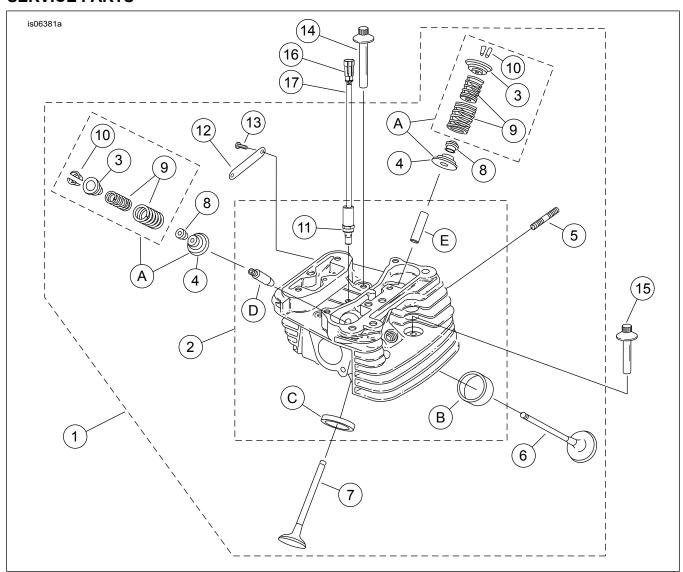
SE120R Screamin' Eagle Pro Crate Engine (Beta) Cylinder Heads and Valves
